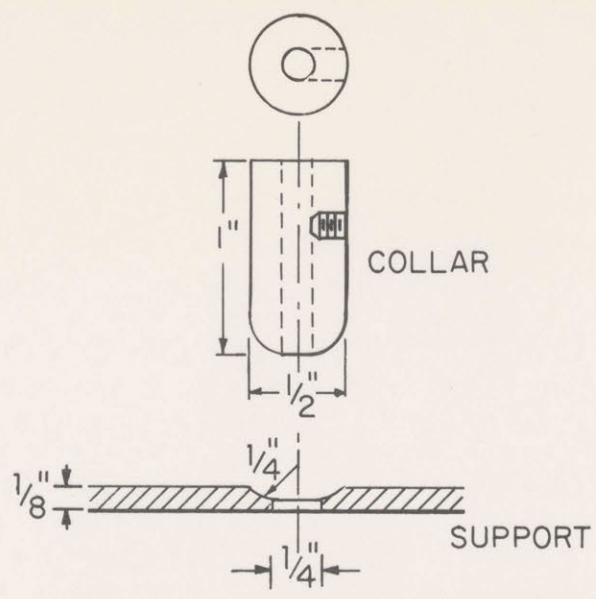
13a. COLLAR AND SUPPORT-DIMENSIONS
